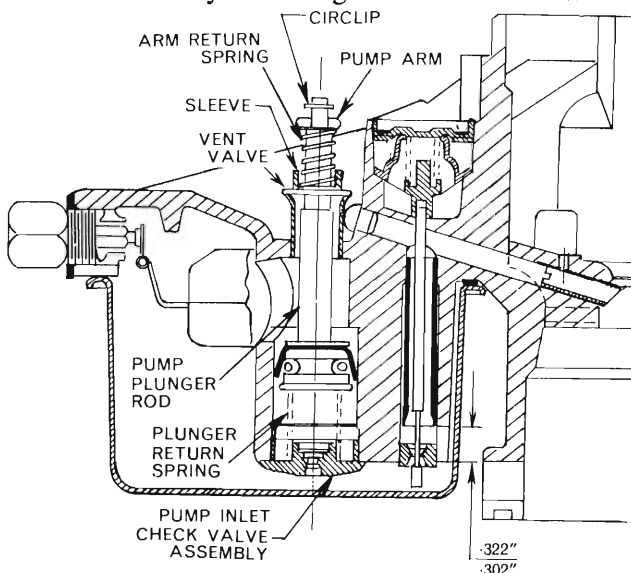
Sectioned view of carburettor showing the accelerator pump and step-up needle assembly
